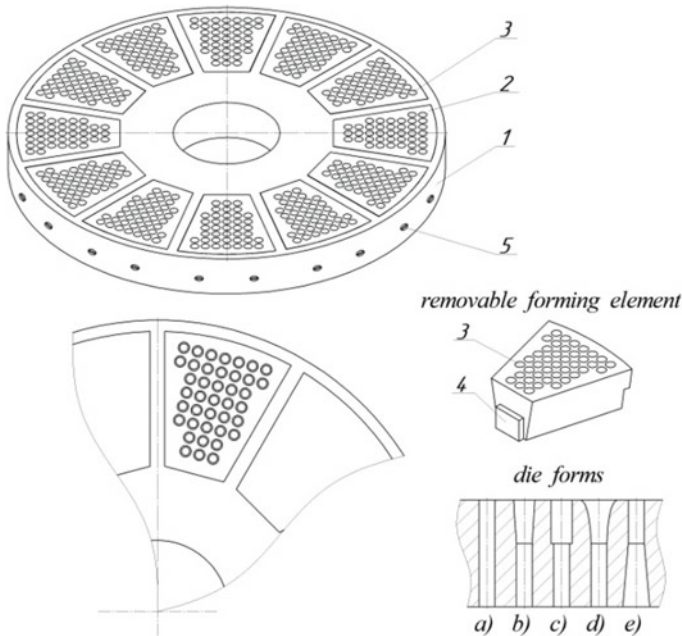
Precast matrix of the press granulator 1—jig, 2—removable forming elements, 3—dies, 4—flange, 5—contouring screws
